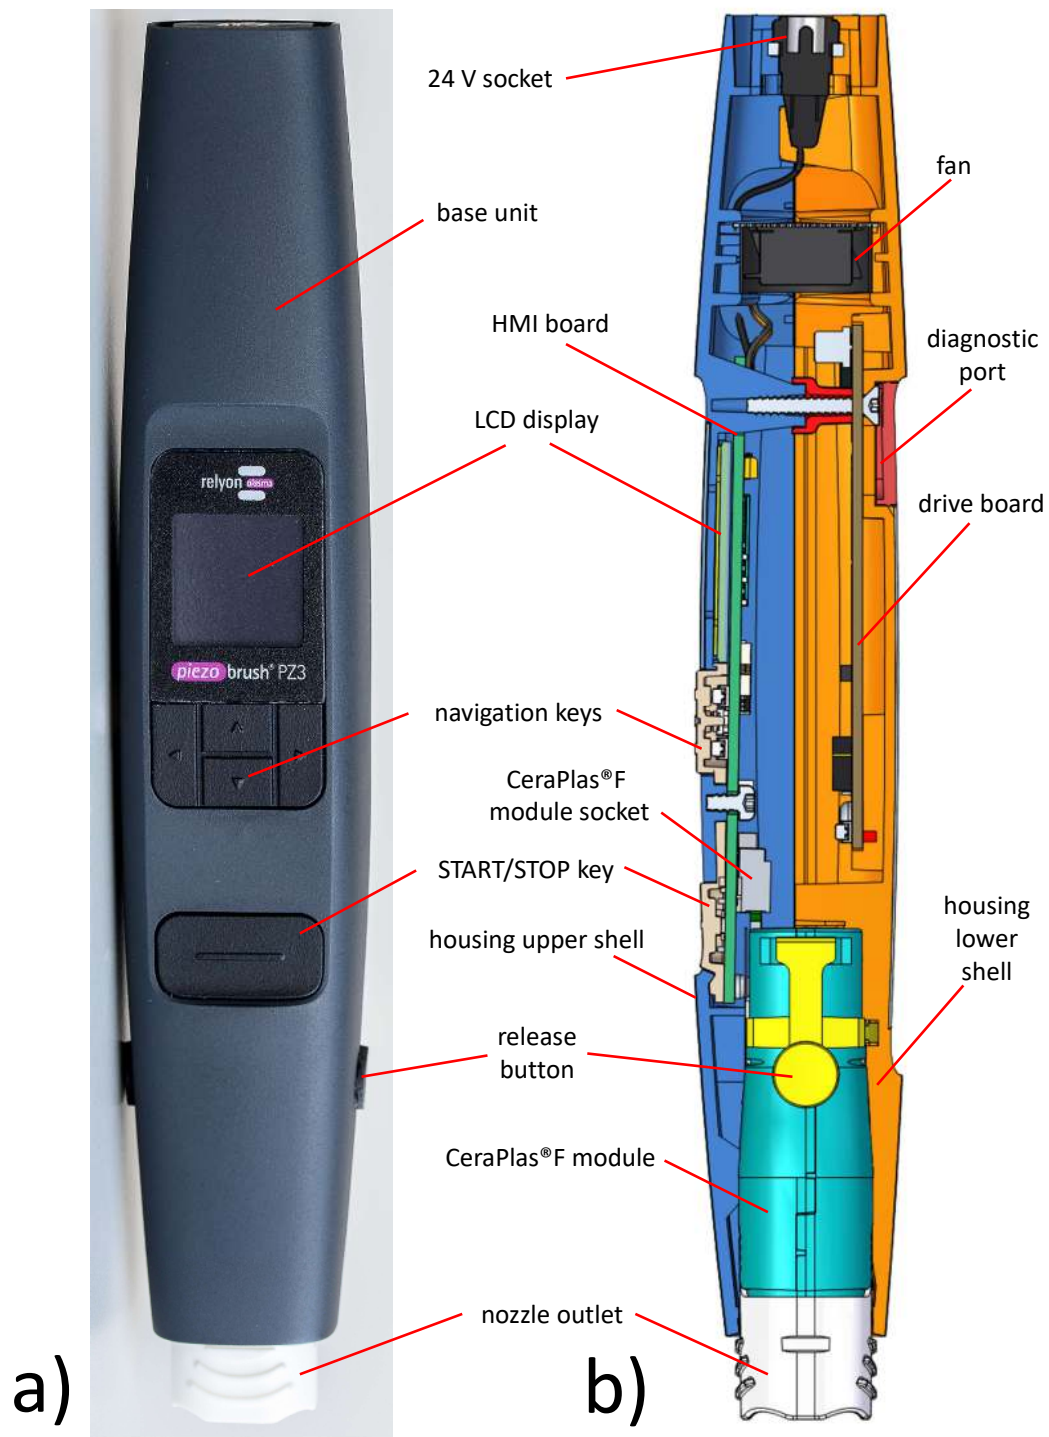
Front view a) and side view cross-section b) of the piezobrush® PZ3.
